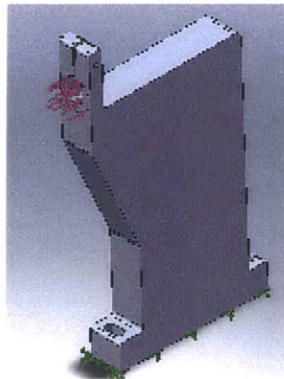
Scheme of Rigid Body Dynamics of the Horizontal Fixture and Frontal Fixture.
